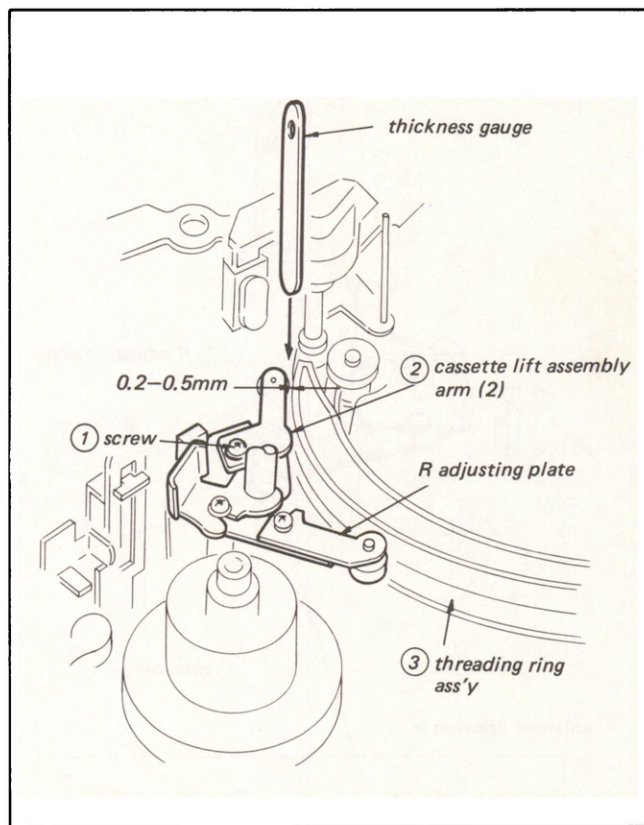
Clearance adjustment of cassette lift assembly arm
